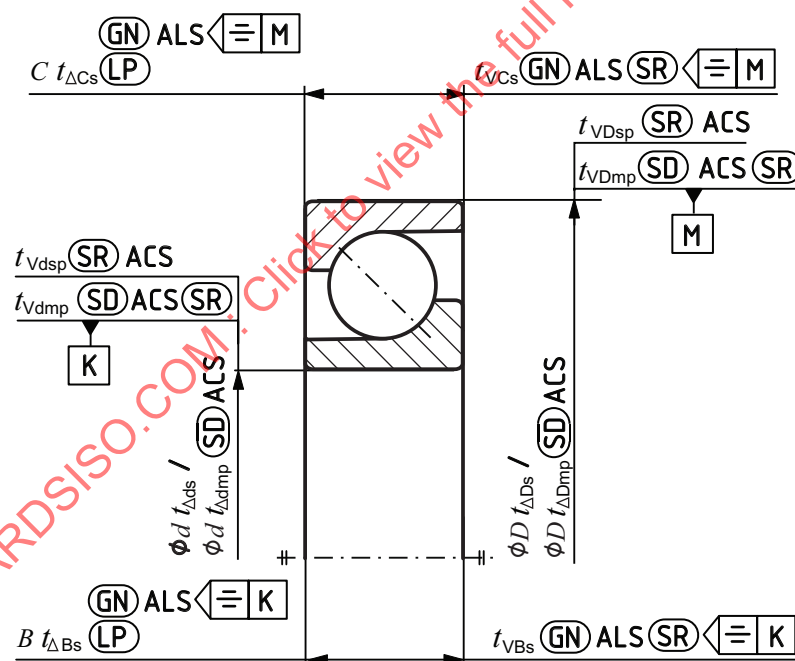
Size specification for single components for bearing with cylindrical bore and symmetrical rings
